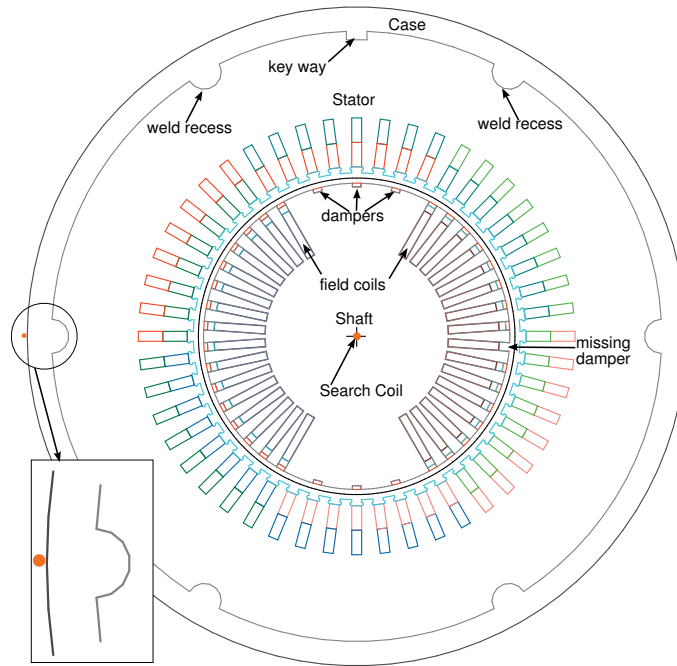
Cross section of the synchronous generator showing key way, weld recesses, missing damper and shaft based search coil
